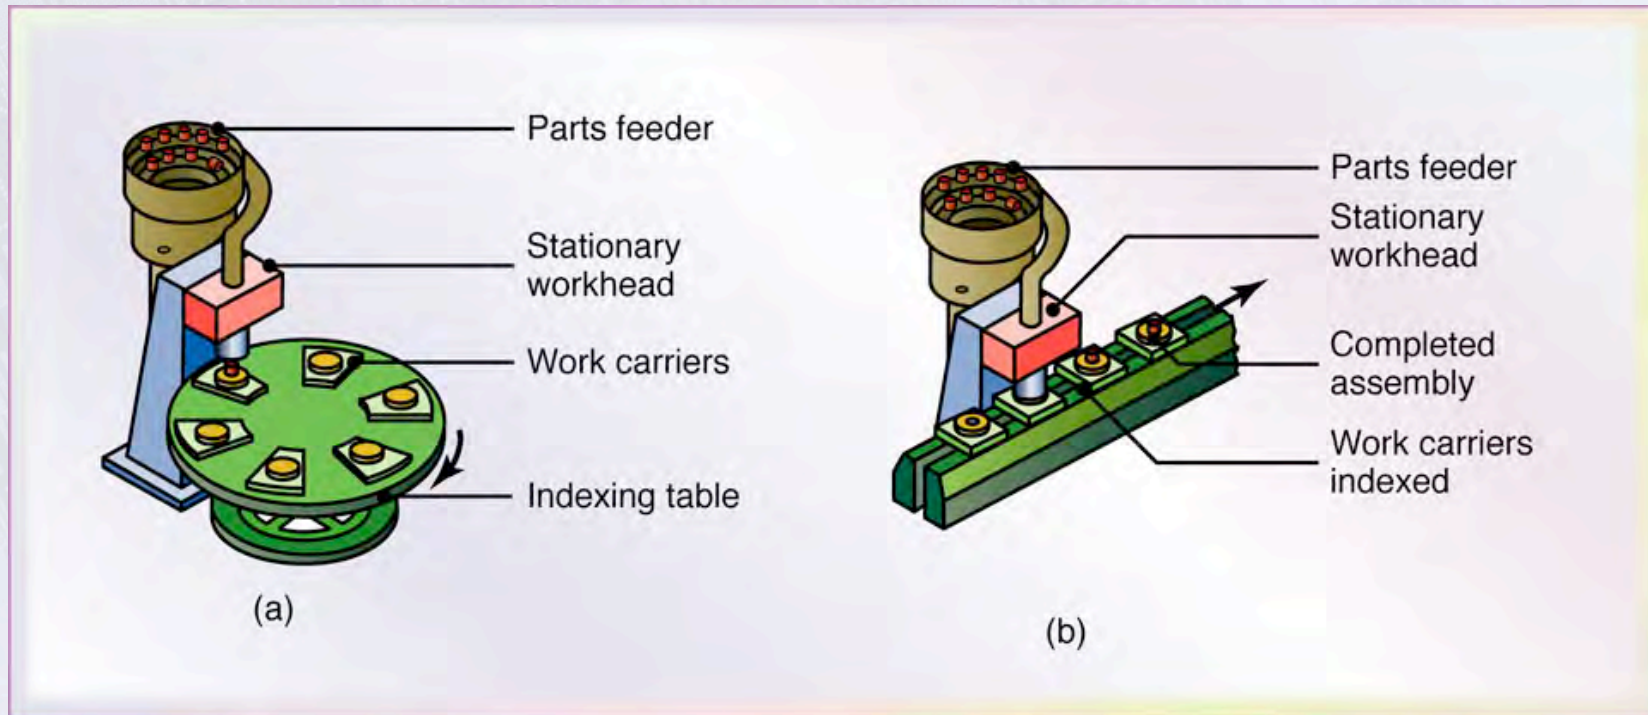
Transfer systems for automated assembly: (a) rotary indexing machine and (b) in-line indexing machine. *Source:* After G. Boothroyd.
